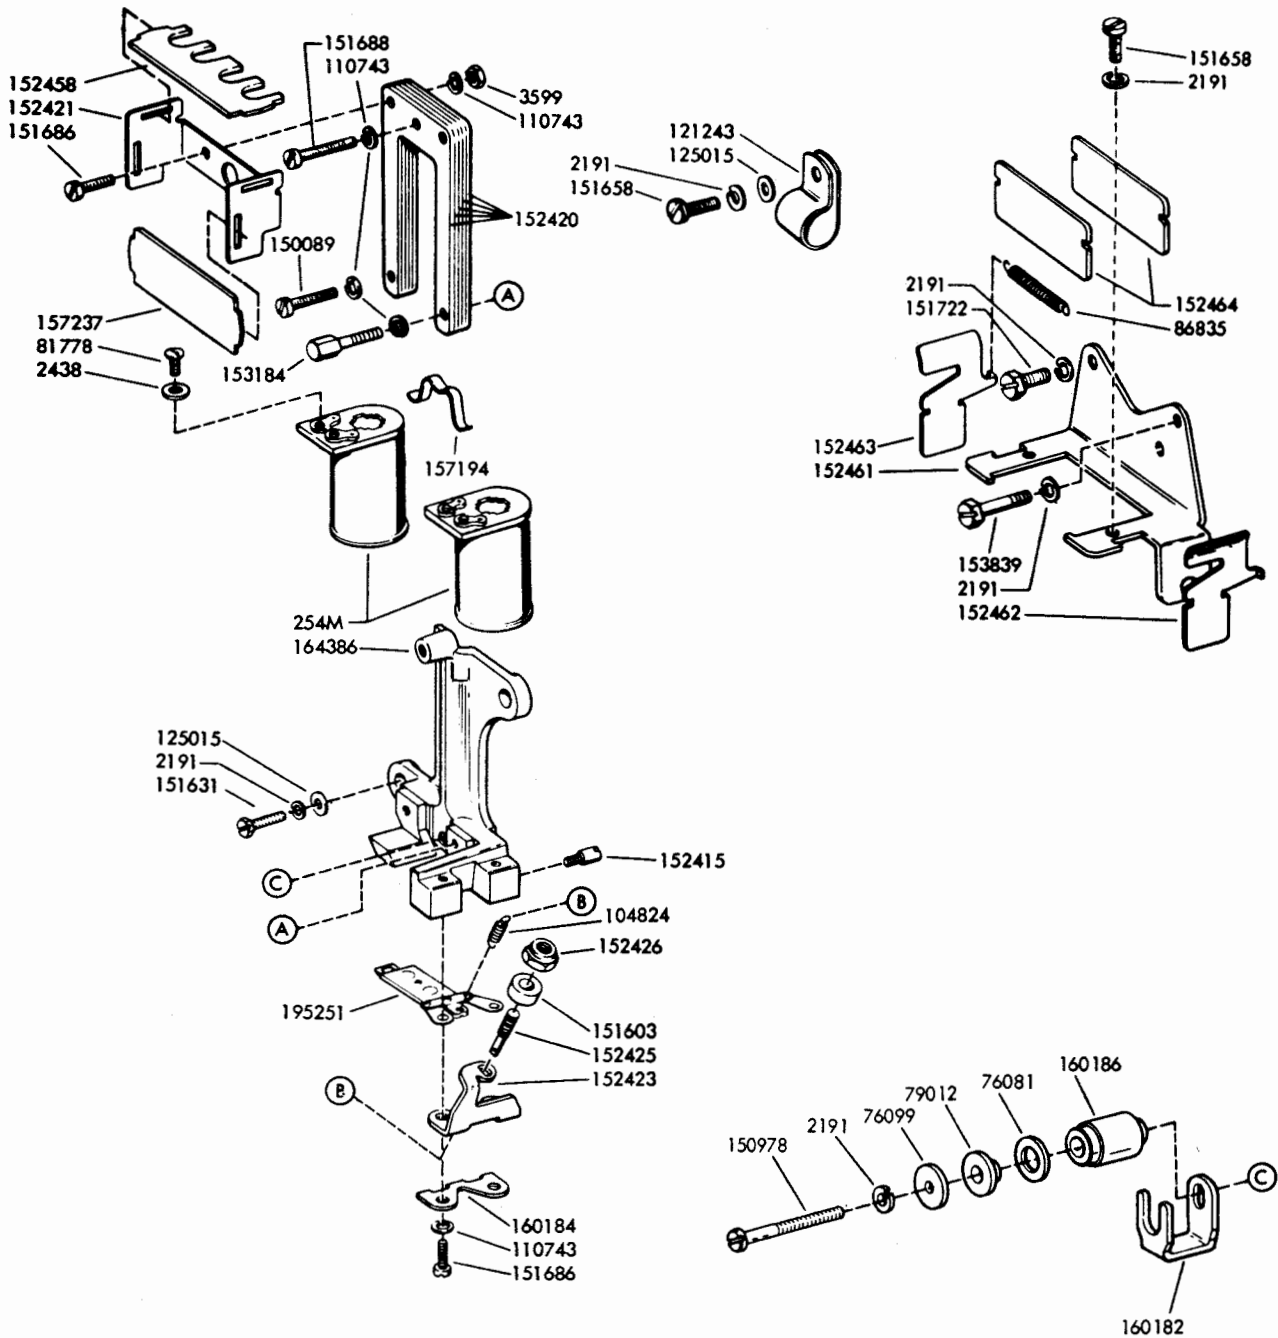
Selector Magnet Mechanism - Used on High-Level Sets
